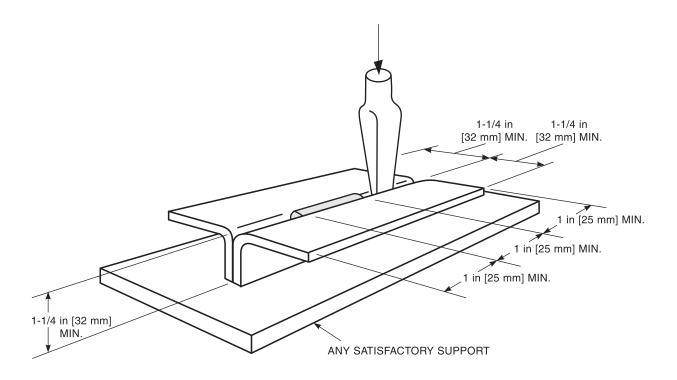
C—Test for Flare-V-Groove Welds [see 4.6.3.2(2)(b)]
